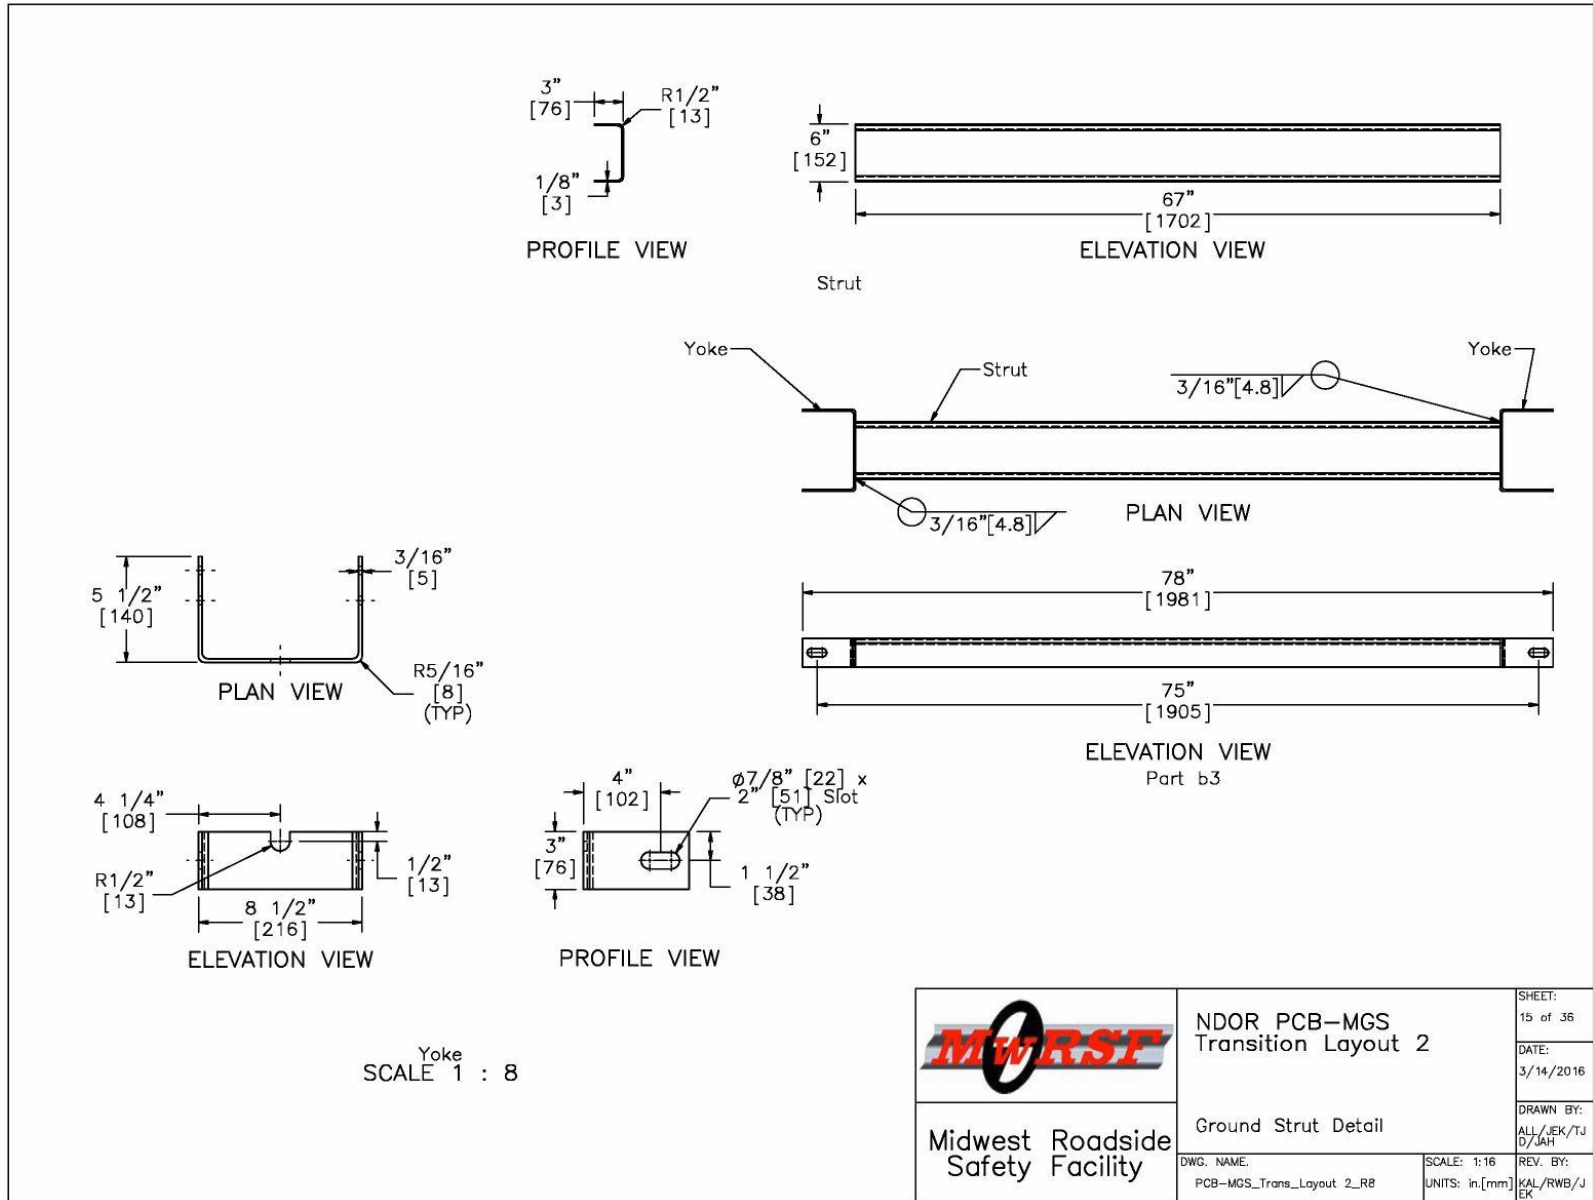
Ground Strut Detail, Test No. MGSPCB-1
